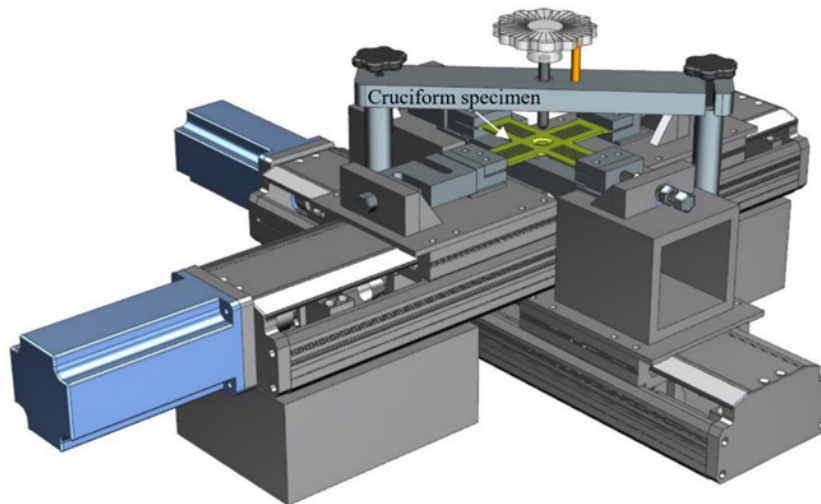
Computer-aided drawing (CAD) of the biaxial tension under bending and compression (BTBC) testing machine [89].
